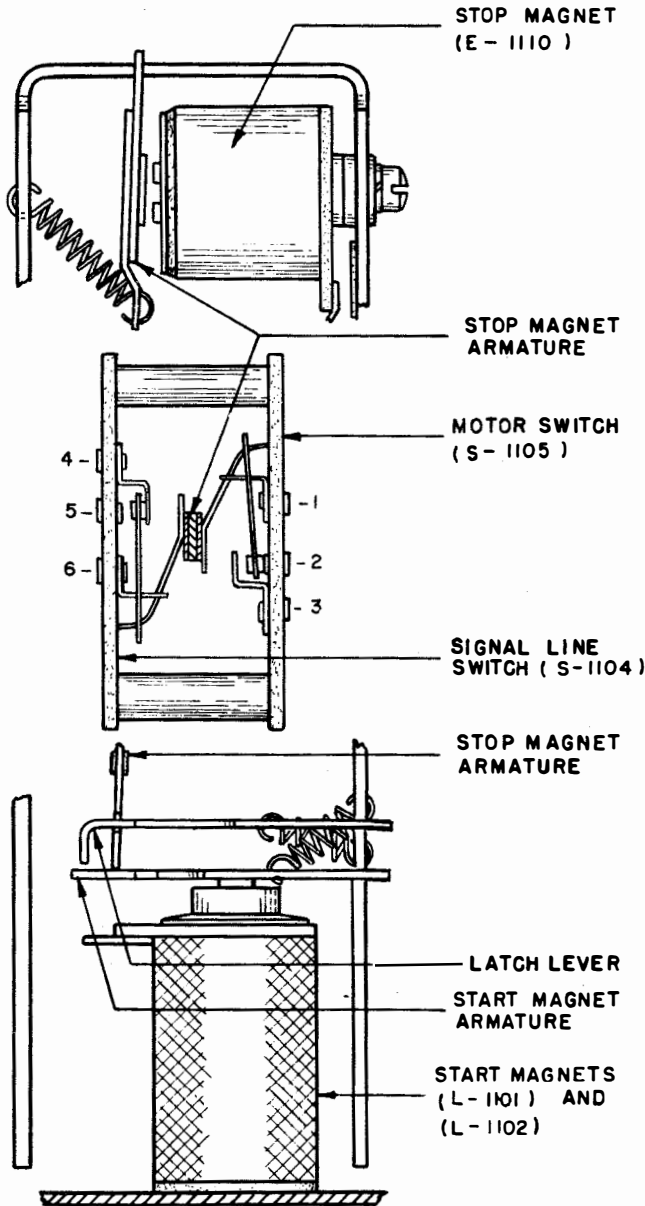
Electrical Motor Control Mechanism, Start Position
